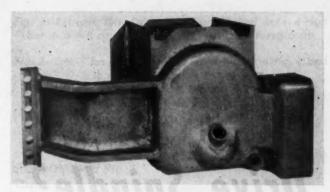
Above—Journal box designed to utilize castings, forgings, pressings and torch-cut bars. A minimum number of parts are employed with physicals to suit, the top member being a forging of areater hardness to resist peening forces from the bearings
